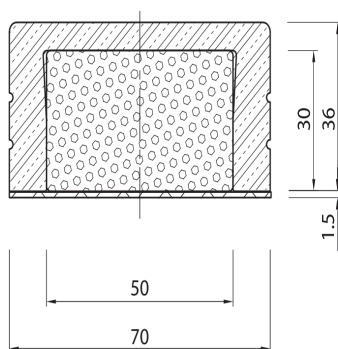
Sectional drawing and dimensions of Sorp 10[®]
